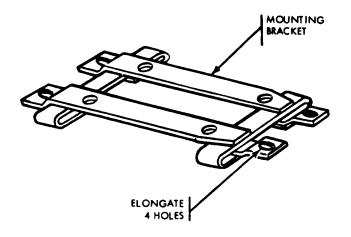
Rework of gas particulate precleaner filter assembly.
